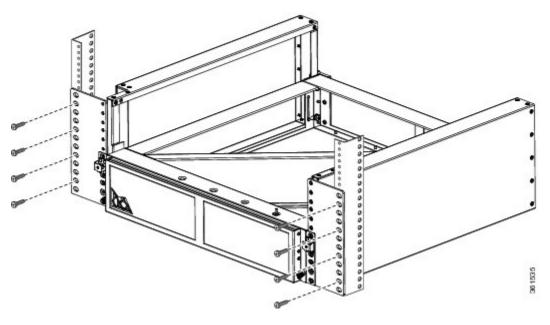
Attaching the Cable Management Tray to the Plenum Assembly
